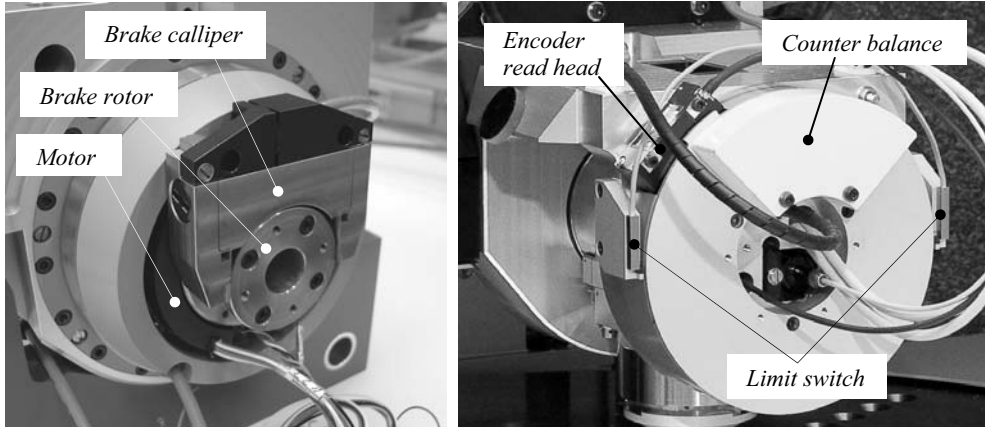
$\Psi$ -axis motor, brake and encoder
